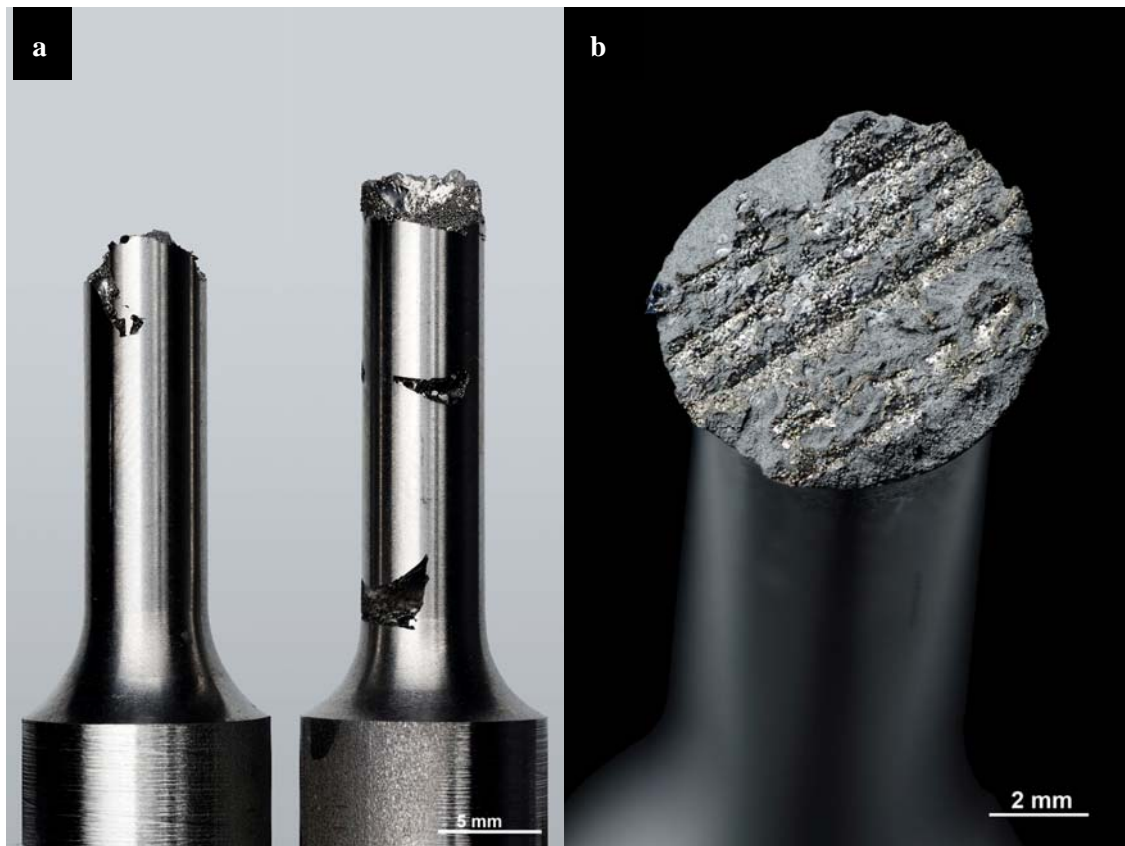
(a) Appearance of a round Ti-6Al-4V sample, multiple defects are present in the sample. The sample fractured at a large defect. (b) Fracture surface of a round Inconel 718 sample. The fracture surface show tracks of lack of bonding.
